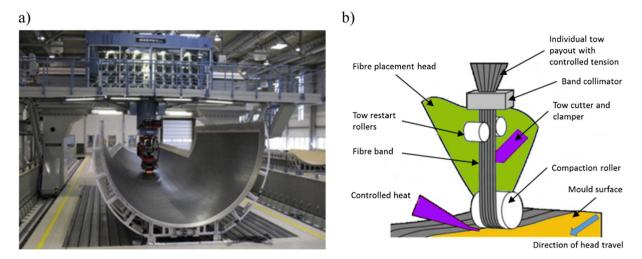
(a) An AFP machine laying into a female mould [3] – (b) Automated fibre placement head, redrawn from [11].
